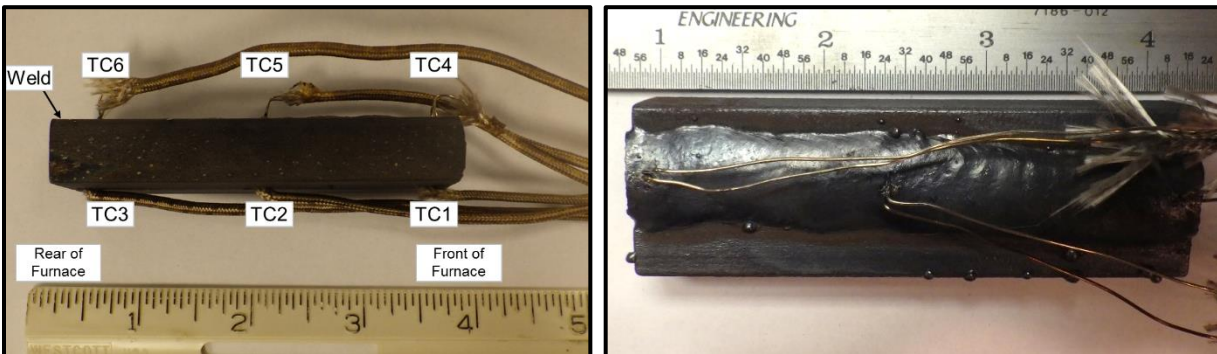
Photographs of the instrumented specimen used to characterize thermal behavior during hot extraction testing. (Left) side view showing all six thermocouples and (Right) top view showing the weld bead and the three thermocouples attached to it.
